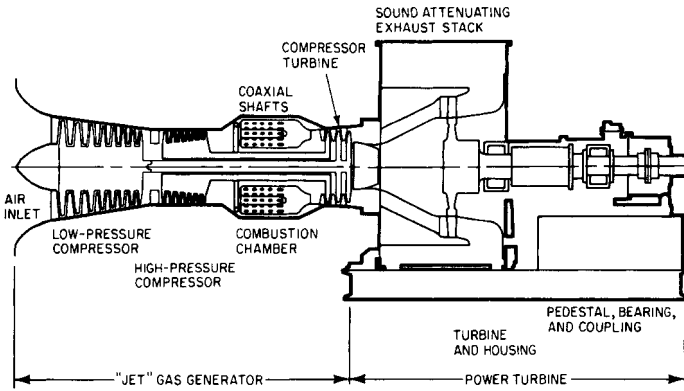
Cross section of aircraft-derivative gas turbine driver (Turbodyne)
